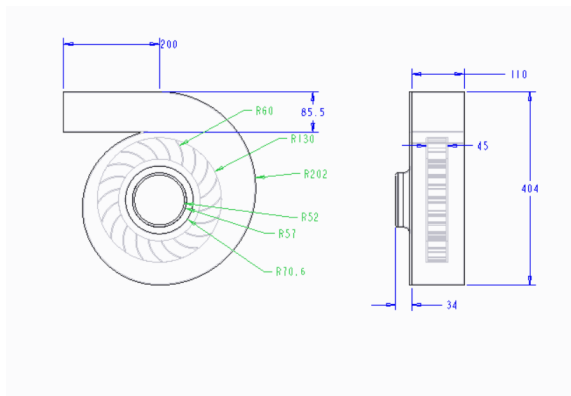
2D Drafting of assembly – centrifugal fan
